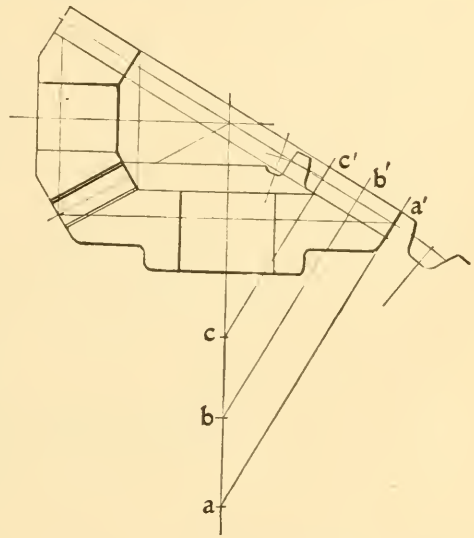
PARALLEL DEPTH BEVEL GEARS.
